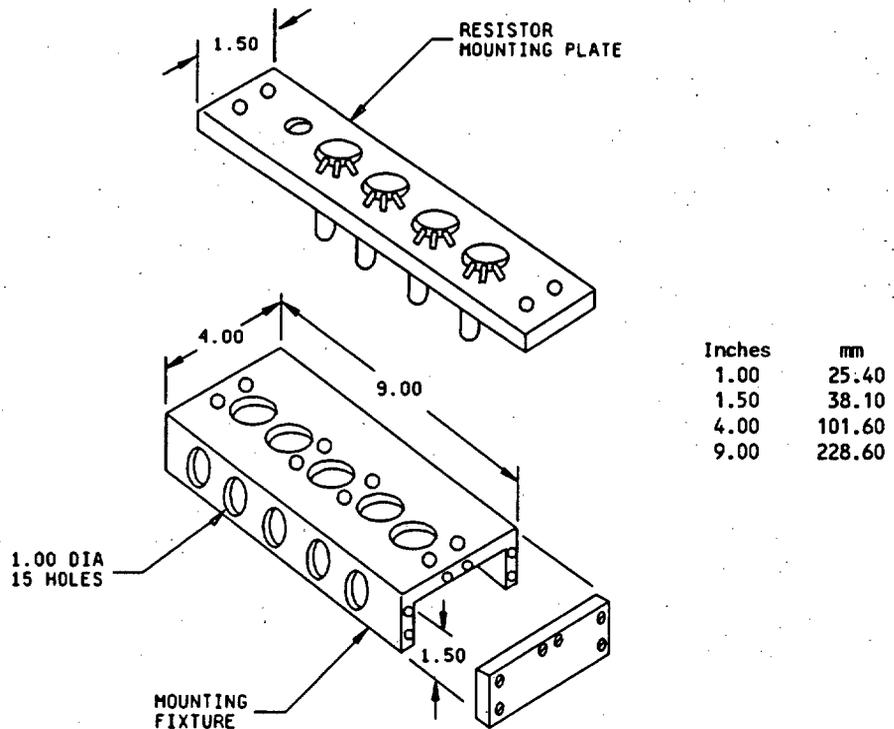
Suggested mounting fixture and resistor mounting plate for shock tests.
